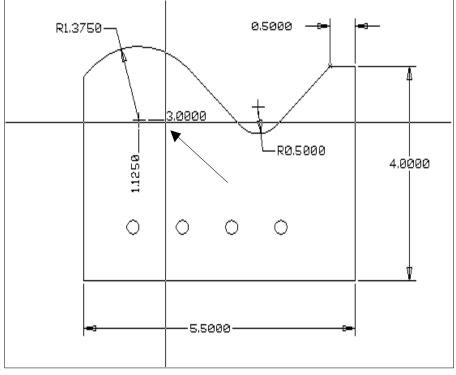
Dimensioning the Y center of the 1 3/8" radius
